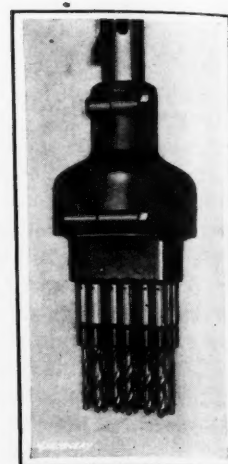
Eighteen-spindle Langelier Auxiliary Drill Head
